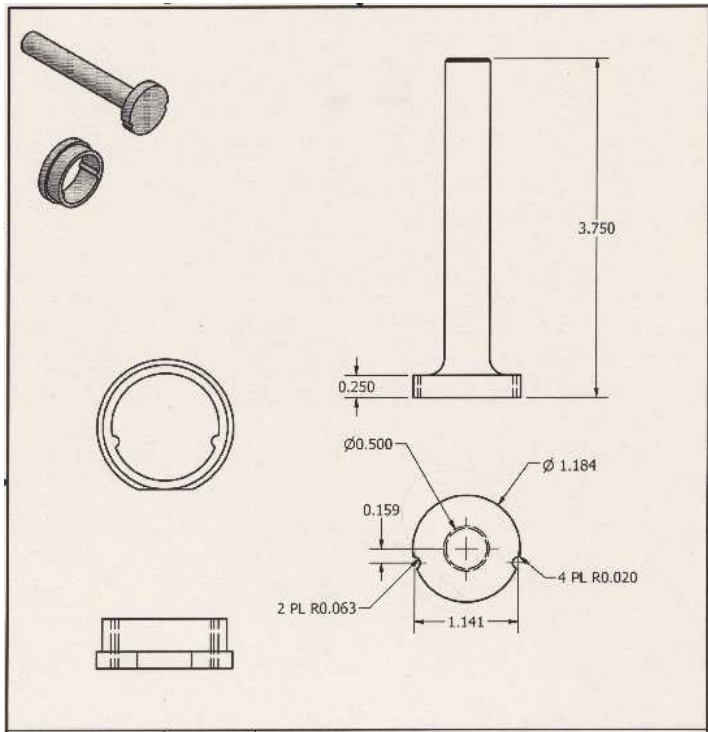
Cutting die and matrix for 30 mm diameter films. All dimensions in inches.
